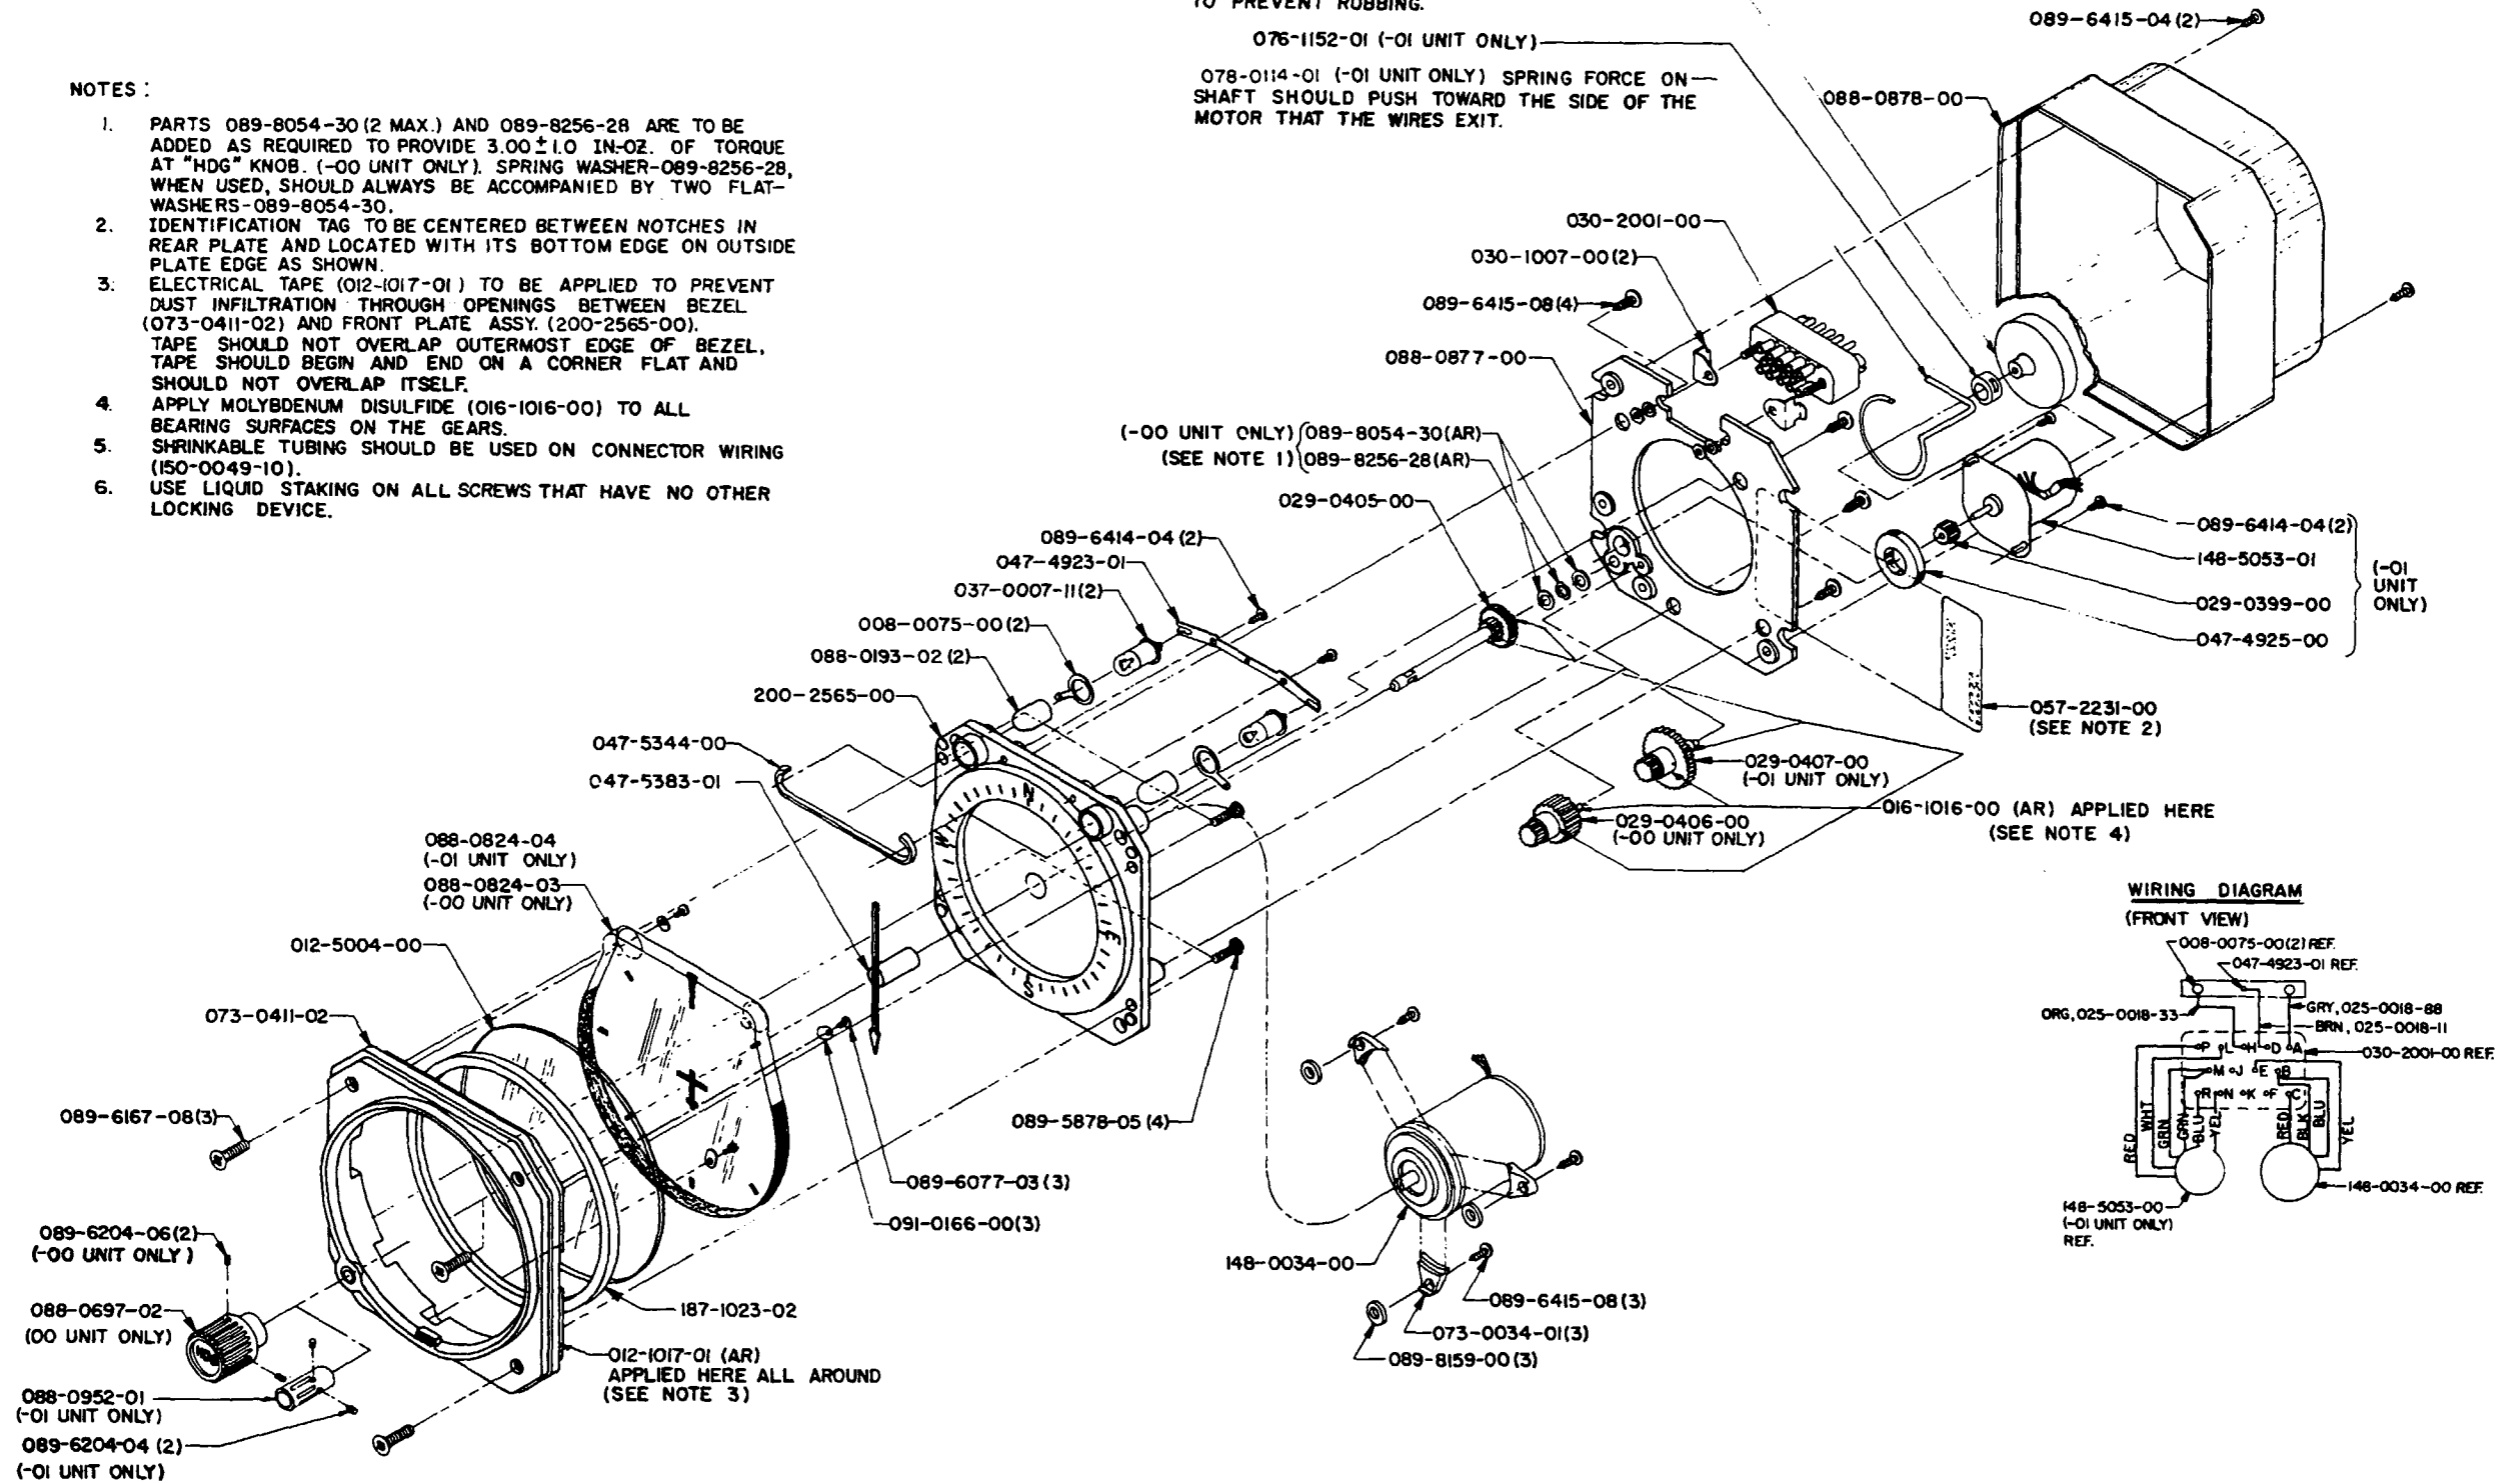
A KI 227 FINAL ASSEMBLY
